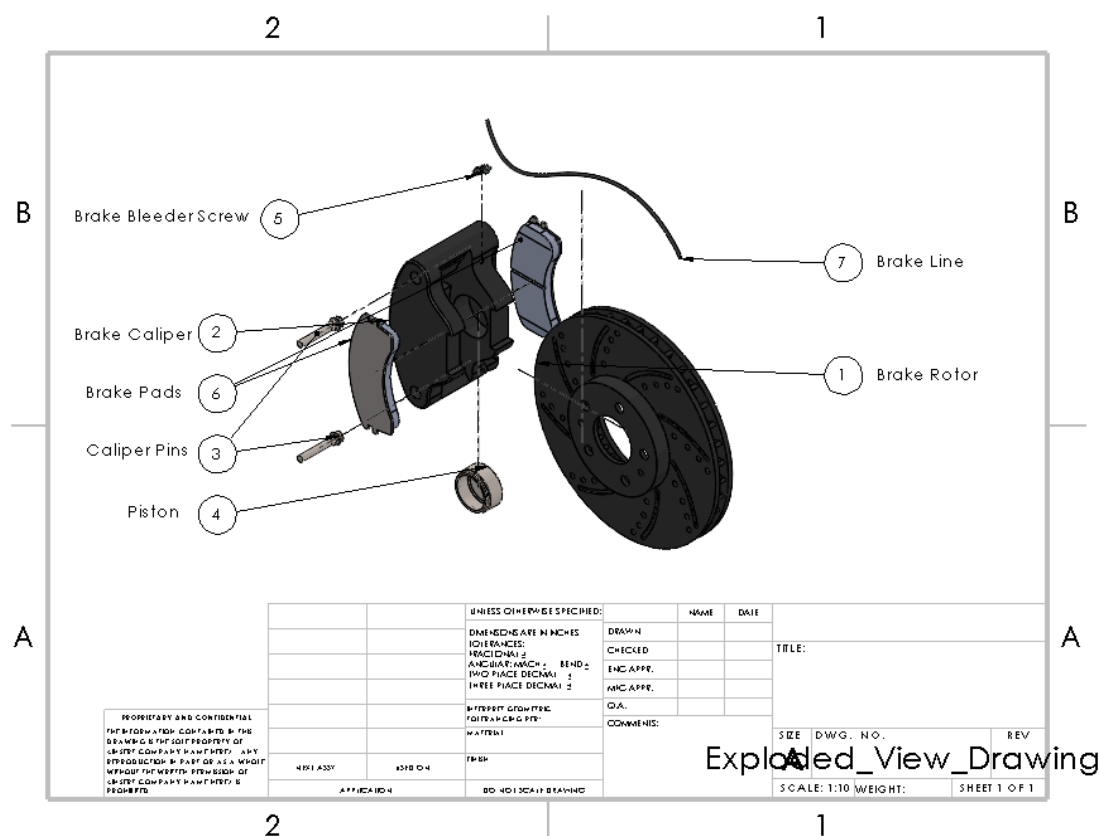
Brake System Assembly Exploded CAD Drawing
